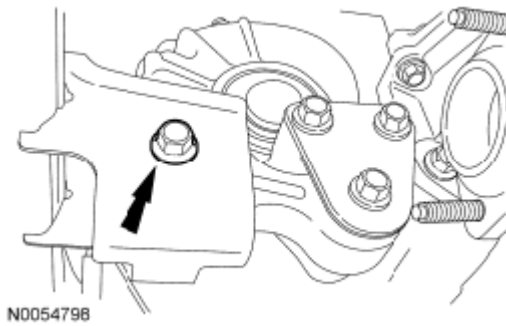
Locating Engine Roll Restrictor-To-Subframe Through Bolt
